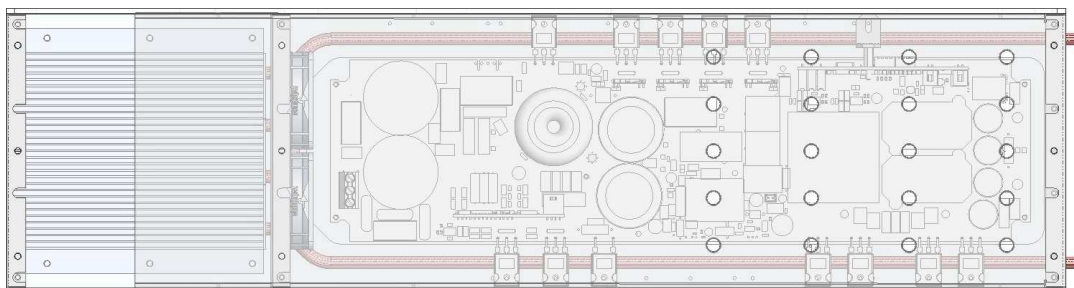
Top view of the cold plate with the PCB and the cooling system.
